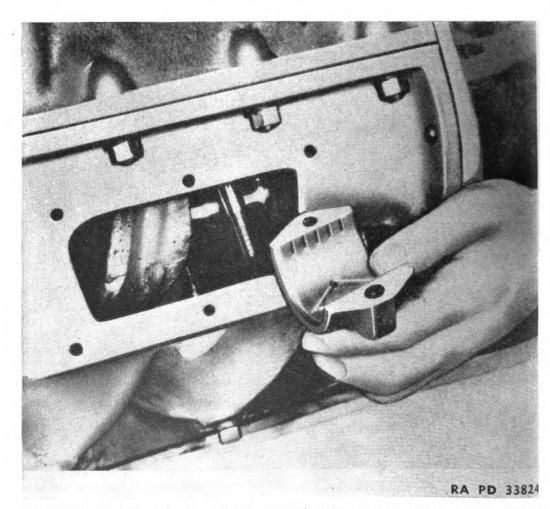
Babbitted-in type connecting rods used in tractors prior to serial number 9G7084.
